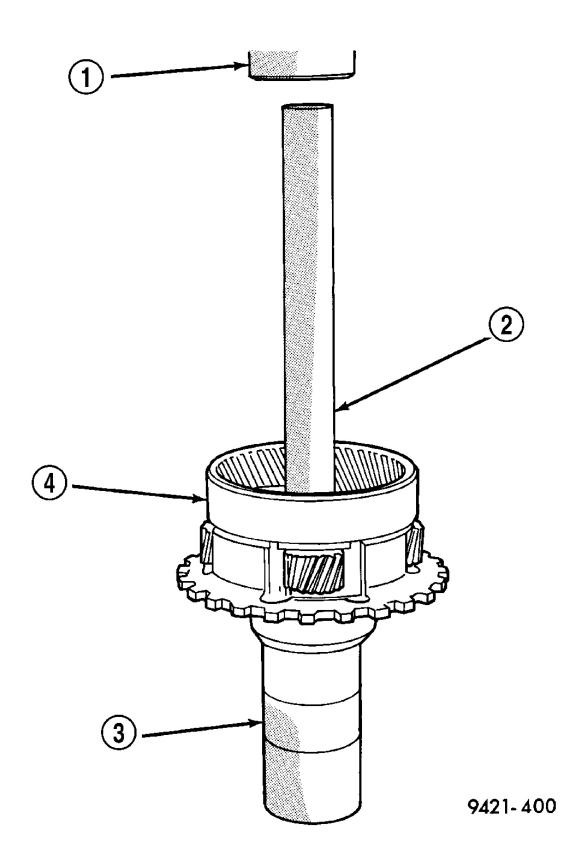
Installing Low/Reverse Clutch Snap Ring Courtesy of CHRYSLER LLC
